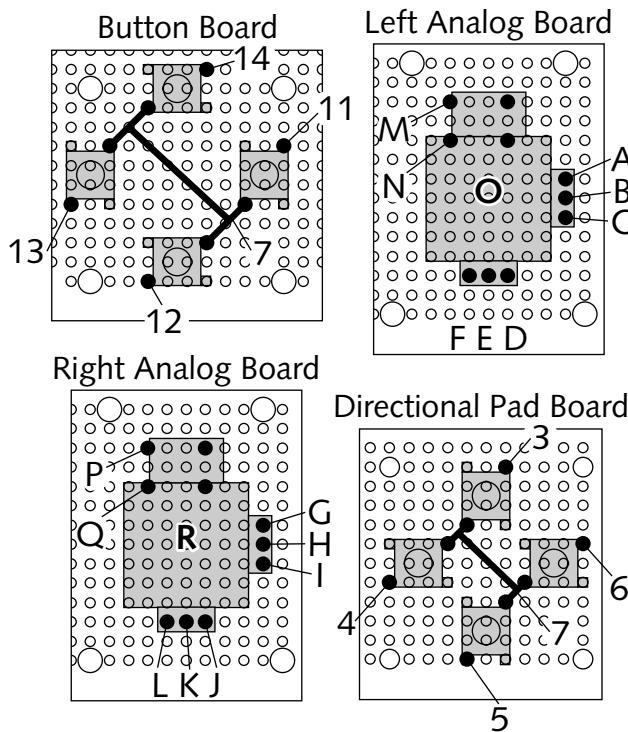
Wiring connections on the backs of the four PC boards.
